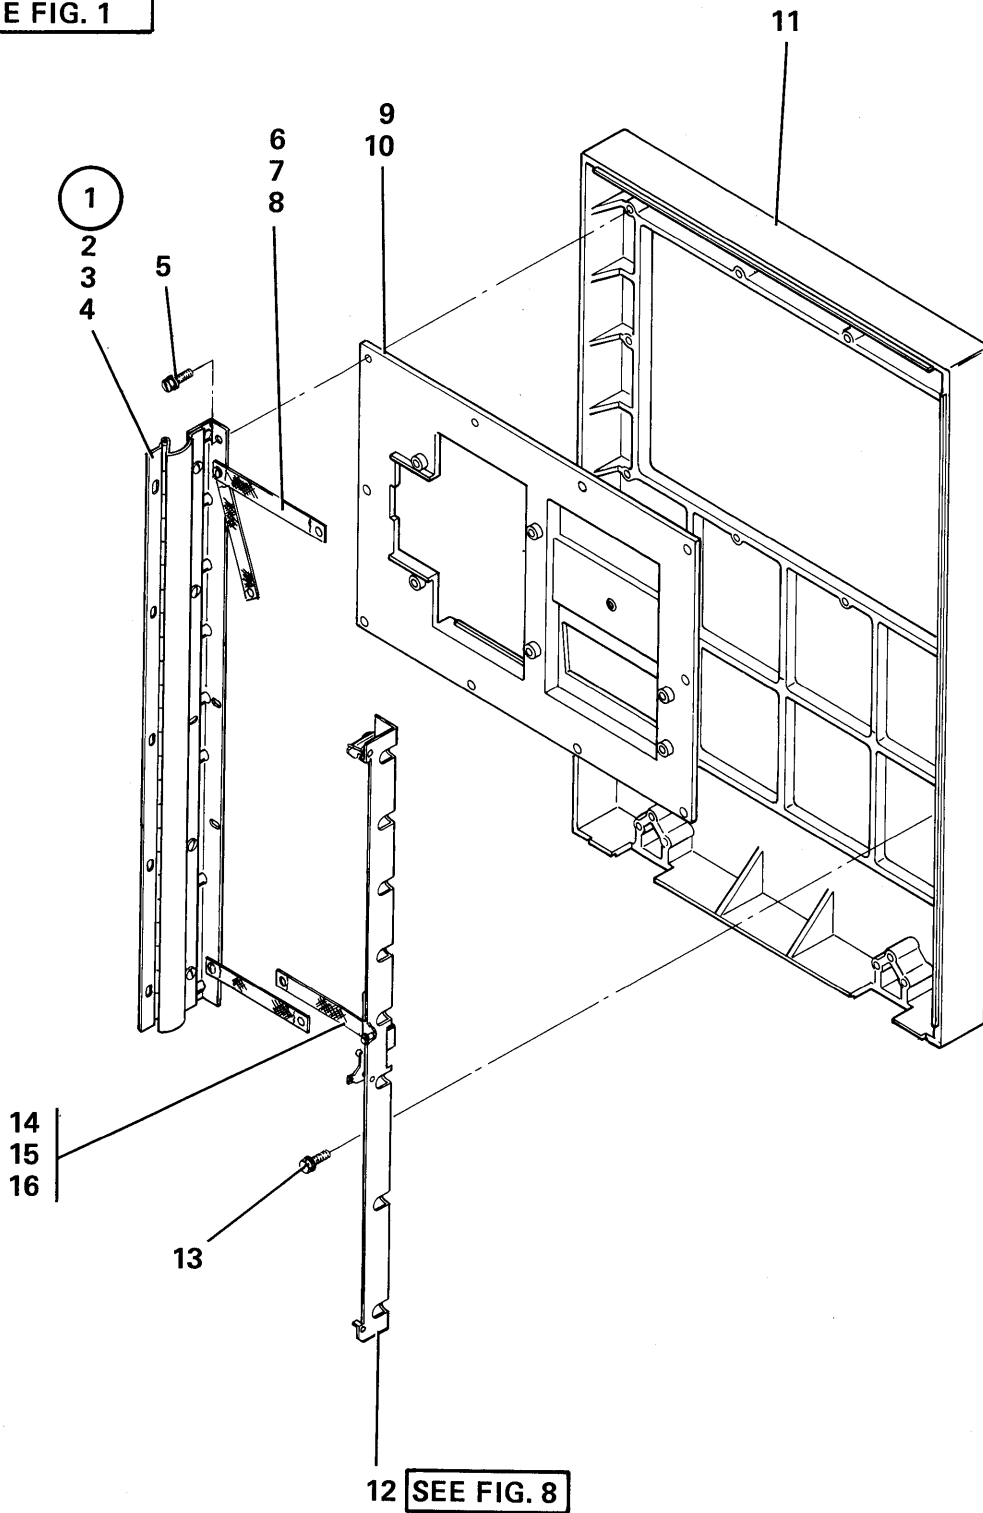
REAR DOOR ASSEMBLY. SEE LIST 3.
